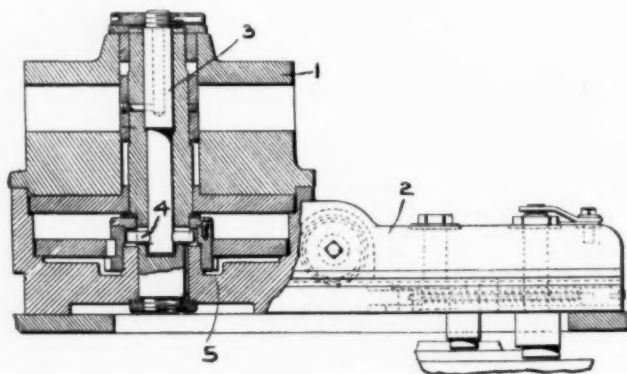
CLAMPING DEVICE FOR TURRET. POTTER & JOHNSTON MACHINE COMPANY
